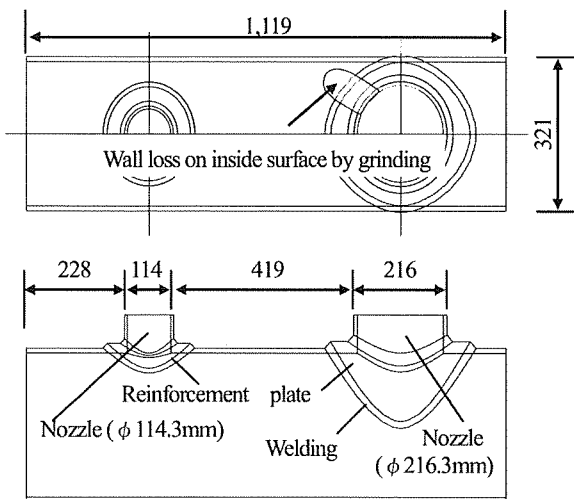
Pipe specimen with reinforcement plate around the nozzle
